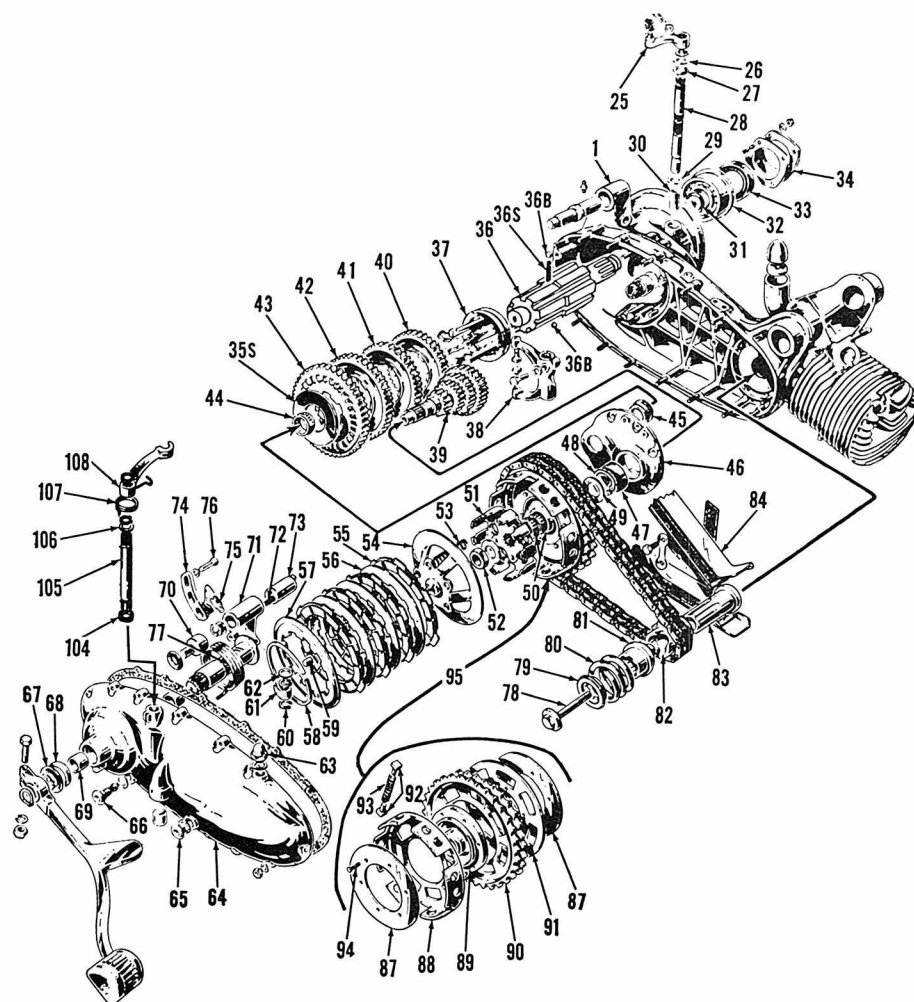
Exploded view of the engine assembly. The crankshaft and rod units are available only as an assembly (2). An early model is shown.
